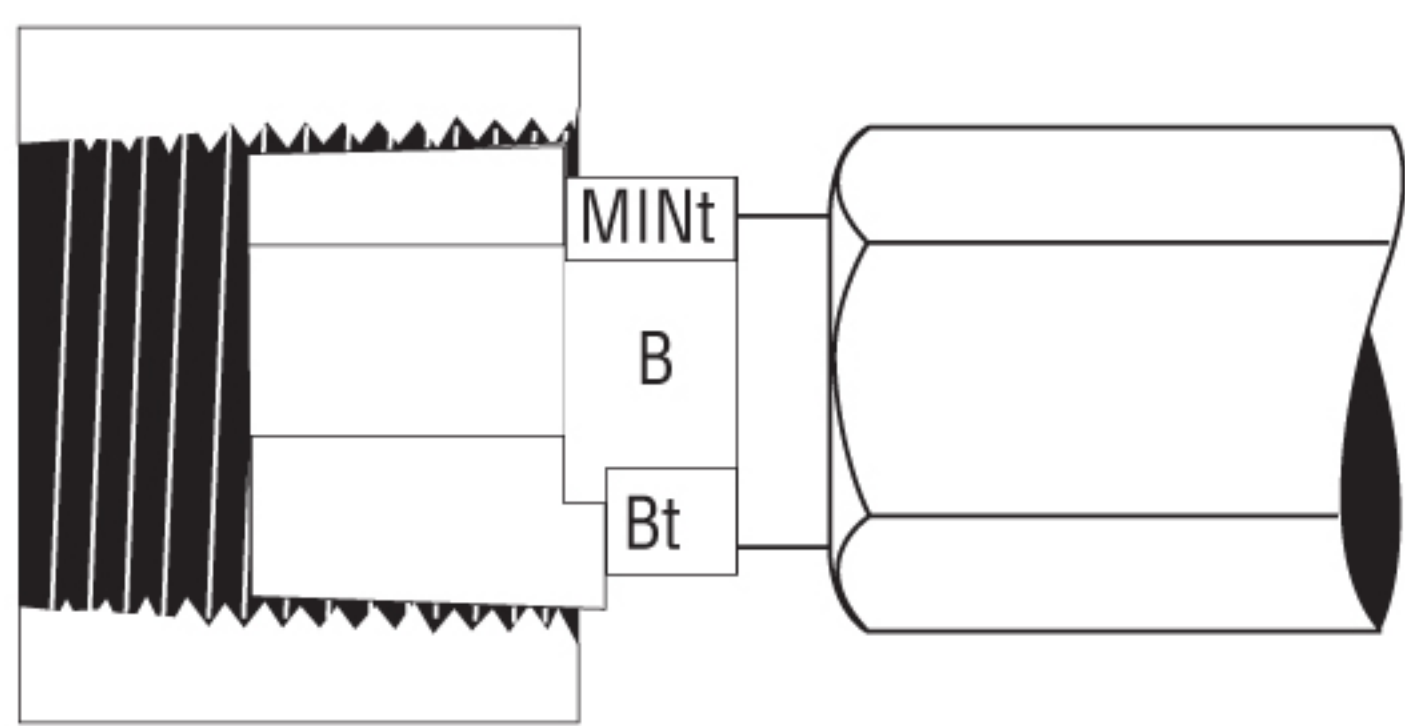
Checking minor diameter truncation with 6 step plain Plug Gages.
